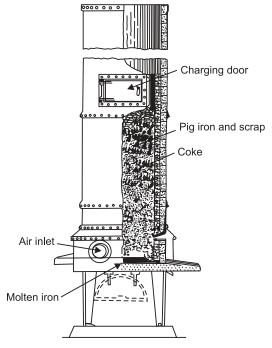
Cupola Furnace for Manufacture of Cast Iron
